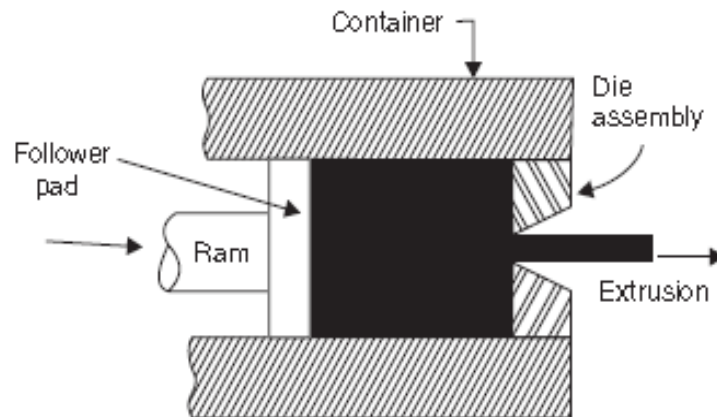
Diagram showing the hot extrusion process in a chamber [LearnMech].
